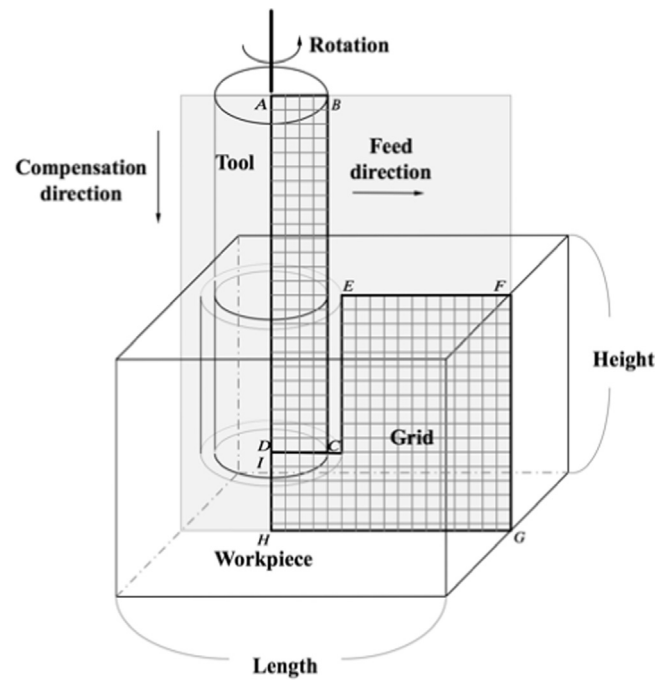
The two-dimensional model of EDM machining process [12]. The color of the grids profiles both tool and workpiece.
